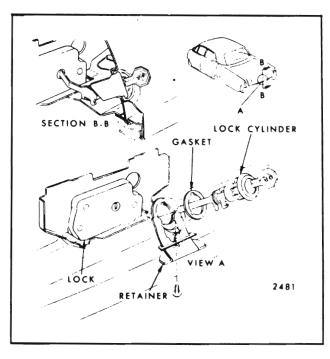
Rear Compartment Lid Lock Cylinder - Chevrolet "B" Shown
